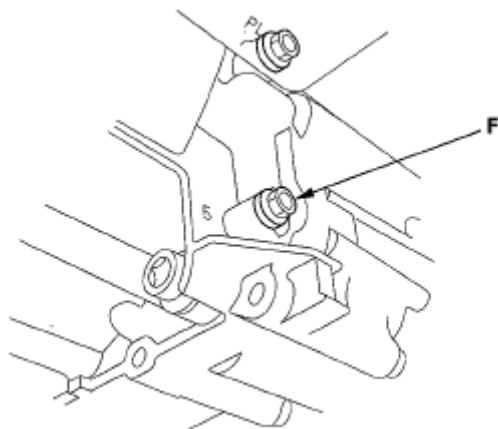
Identifying 5th Clutch Pressure Inspection Port
